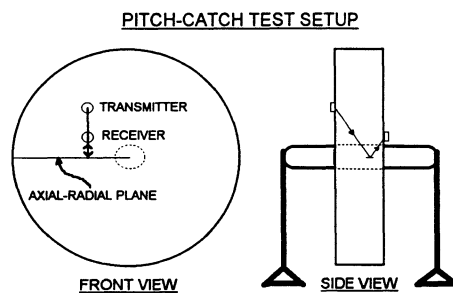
Pitch-Catch test concept as performed on turbine rotor disk forgings.
